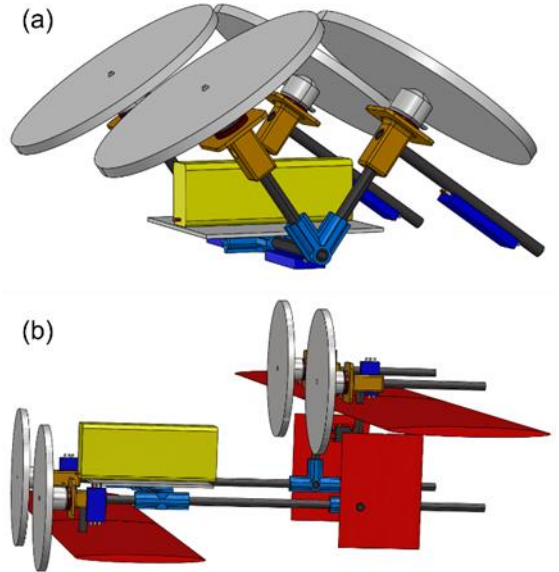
CAD rendering of novel UAV designs. (a) Angled thrust quadcopter. (b) Tandem wing tail-sitter.
